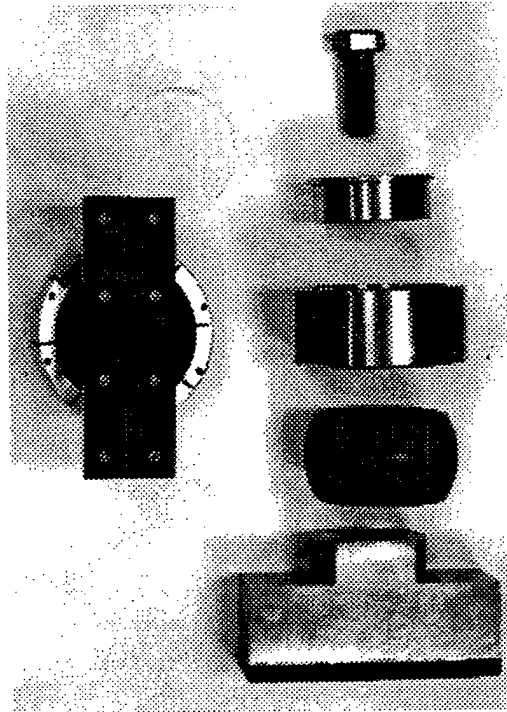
The stainless steel end cap system. From the top are the large single bolt, the new adapter, the bearing race, spherical bearing segment and the stainless steel end cap. On the left is the assembled end cap system.
